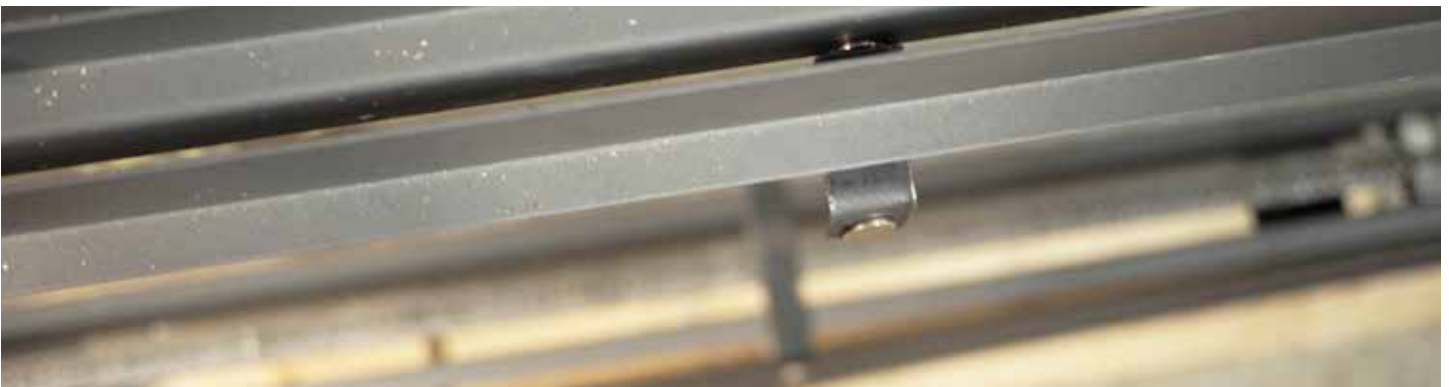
Place "L" shaped metal tab on center magnet with the short end facing up and out. Place magnet on short end face.
